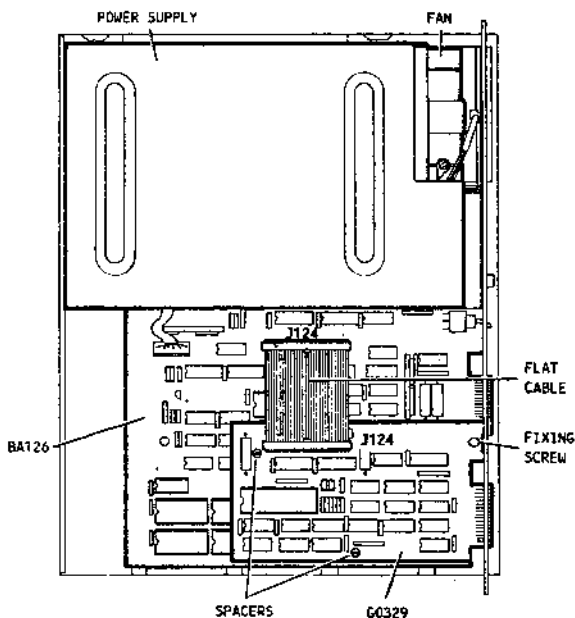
Assembly of Pin Pad and Badge Reader Option Board
